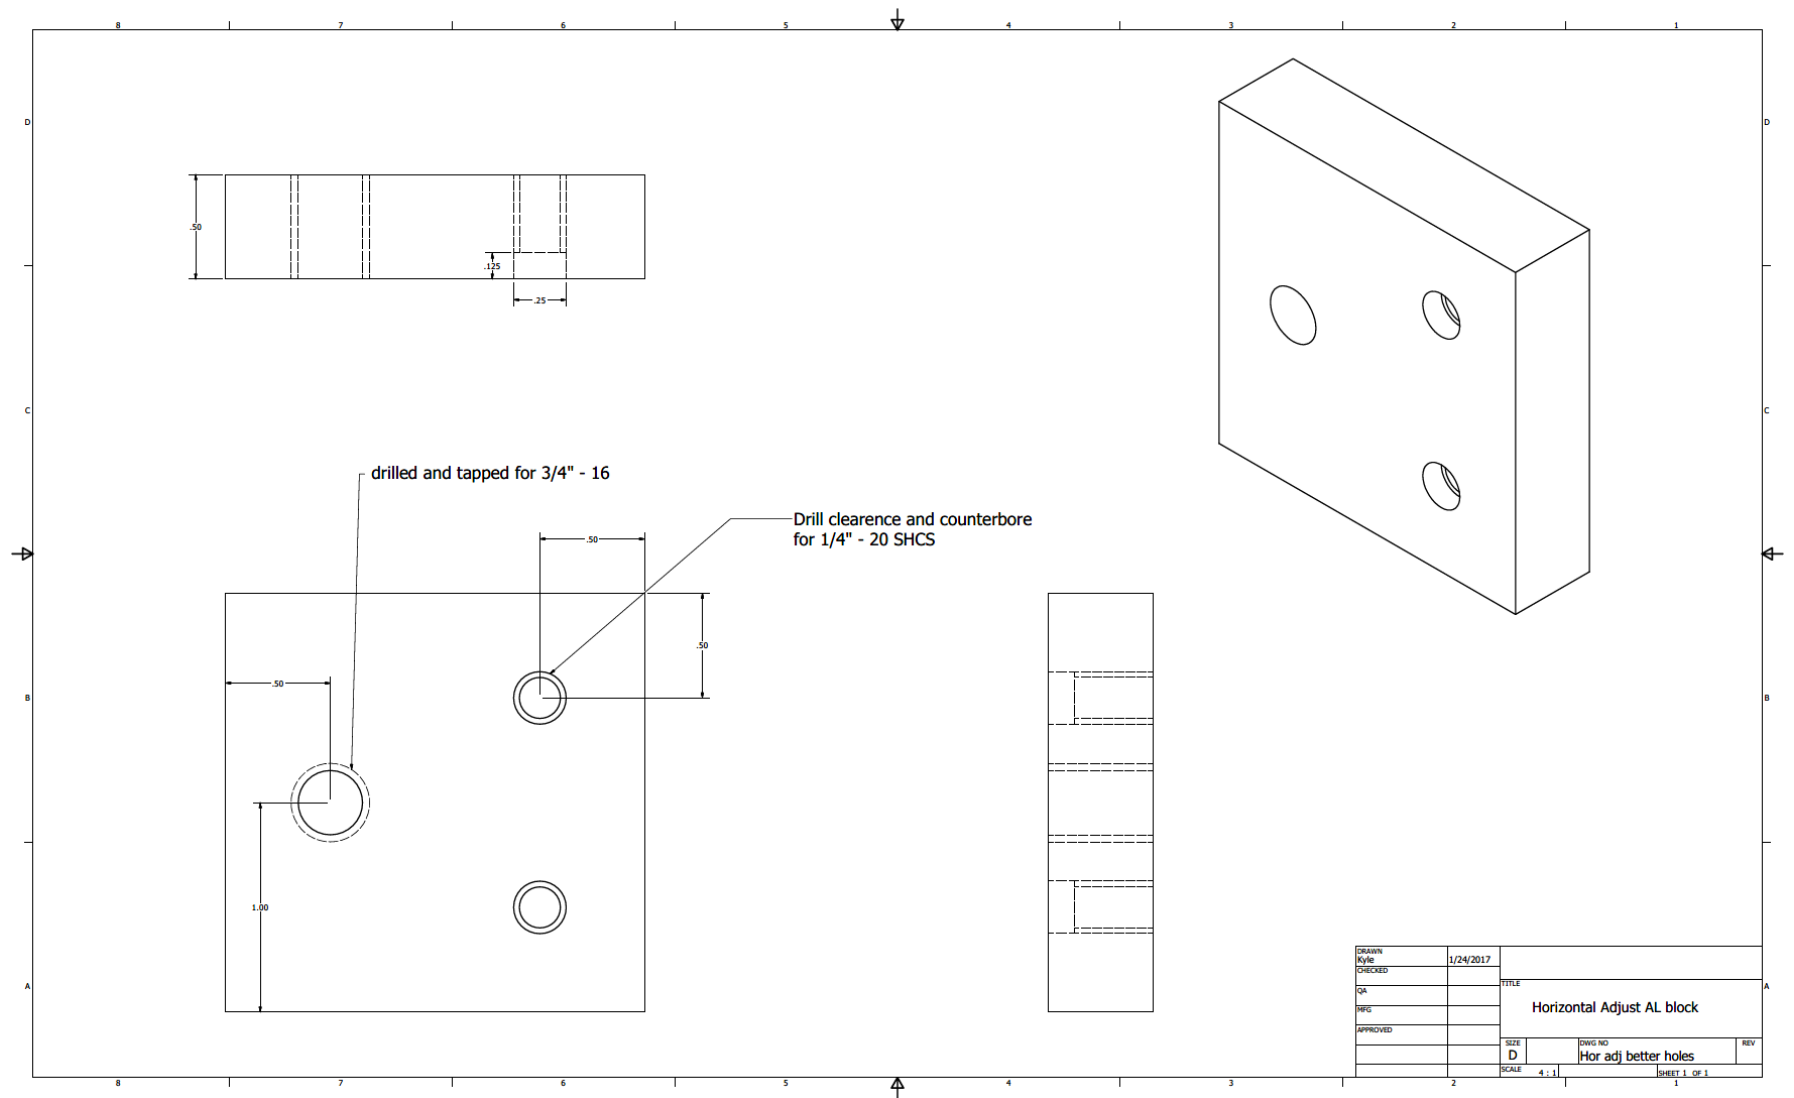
Technical drawing of adjustable aluminum blocks that hold the jack screws for the adjustable plates.
